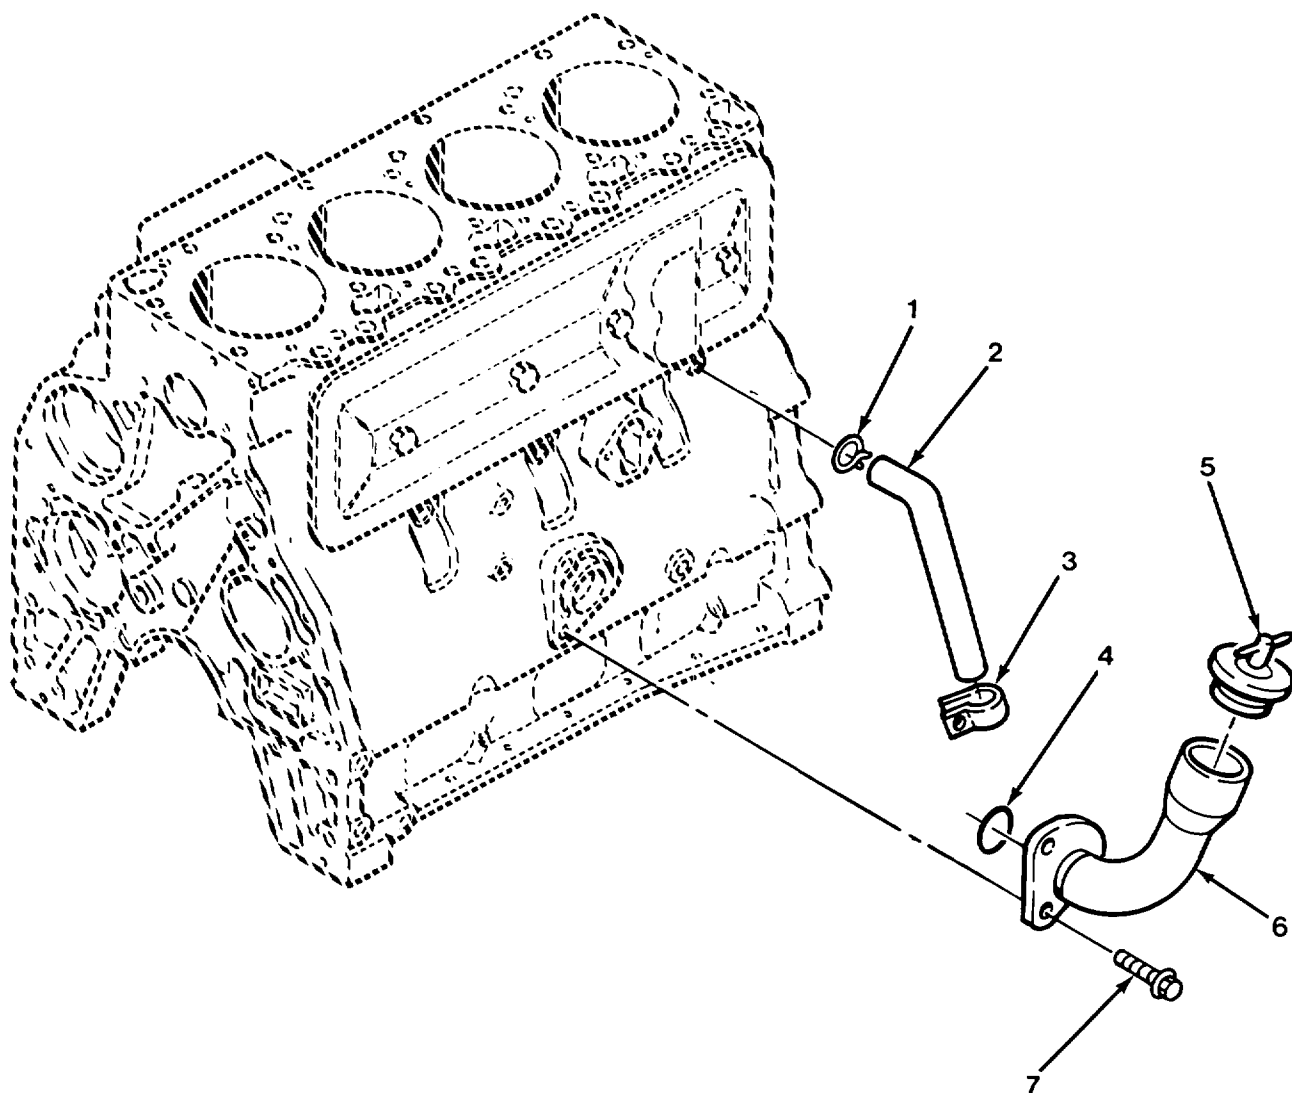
OIL FILLER TUBE AND BREATHER HOSE ASSEMBLY
